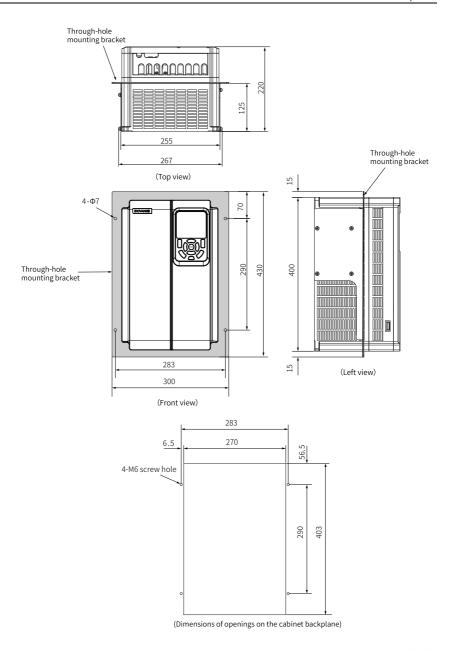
MD500-AZJ-A1T6 through-hole mounting bracket and cut-out dimensions (mm)
